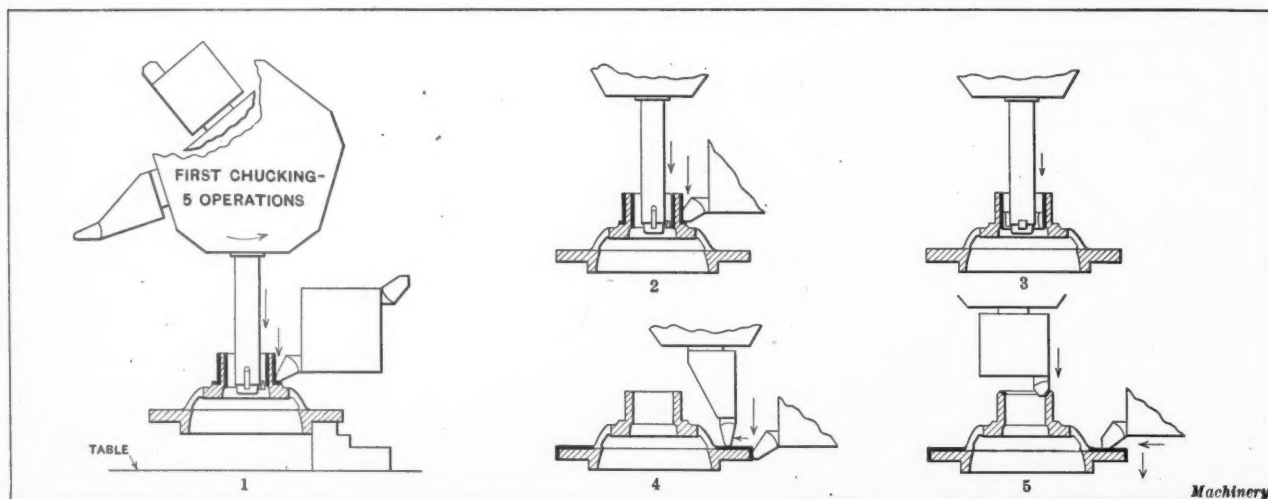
Lay-out of Operations and Tooling used in First Chucking for machining Differential-gear Case shown in Fig. 9
